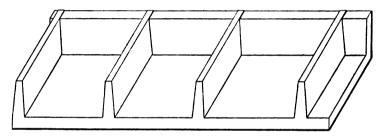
Linotype ; large-work recessed slug. Scale : full size.
